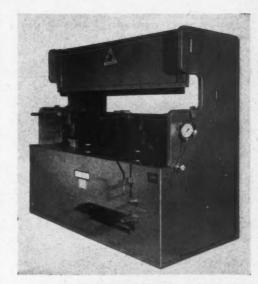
Barnes 140-ton up-stroking hydraulic bending press
